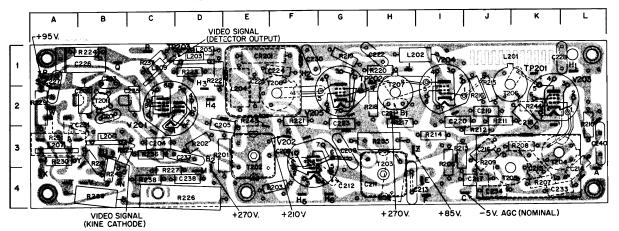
PW200 Sealed Circuit I-F and Video Assembly Composite Diagram
